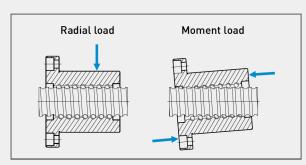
(a) Unbalance load caused by misalignment of the support bearings and nut brackets, inaccurate alignment of the guide surface, inaccurate angle or alignment of the nut mounting surface
